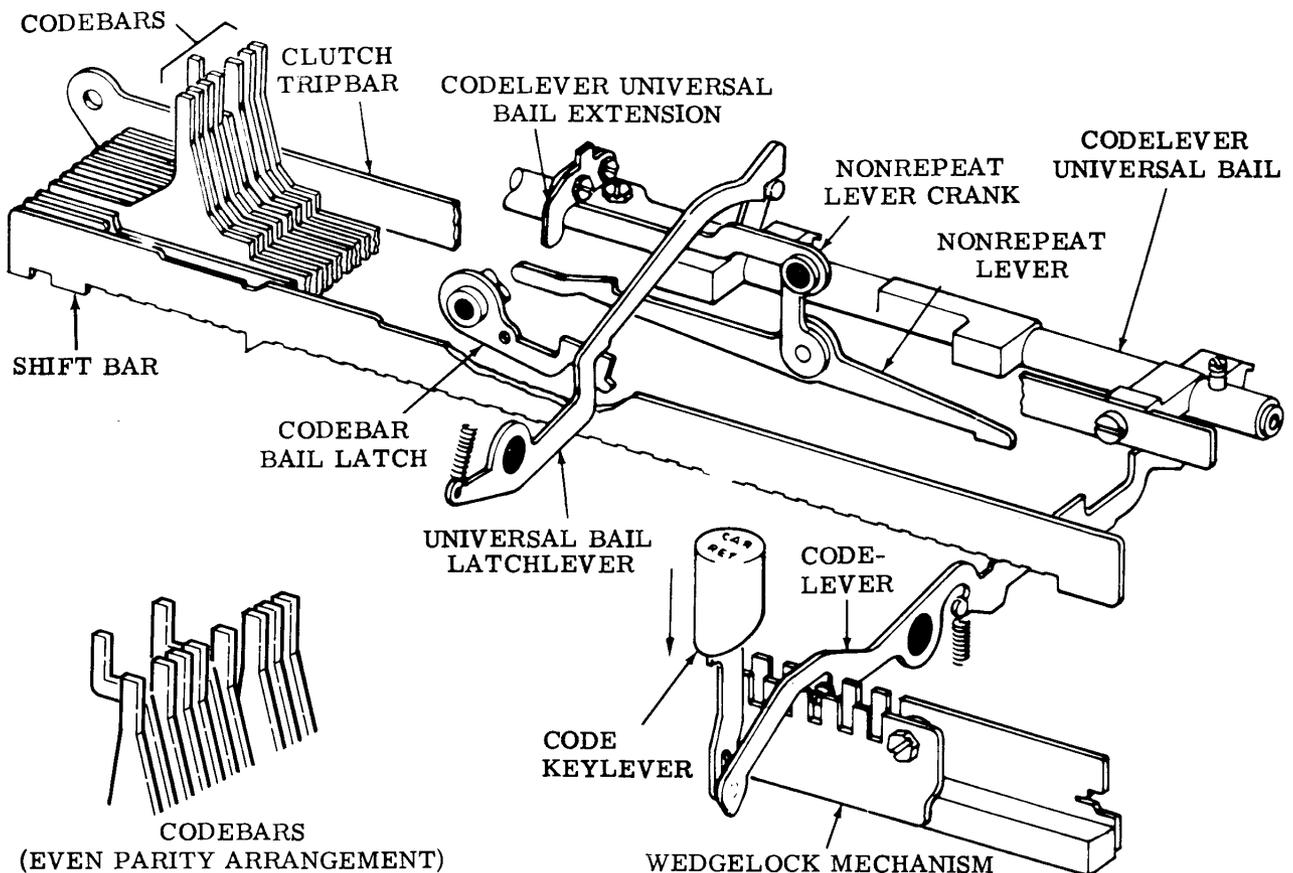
Codebar and Codelever Universal Bail Mechanism
